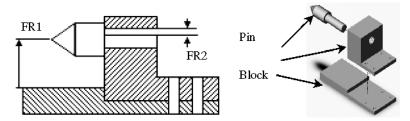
Detail assembly for centering pin mechanism with two FRs.
